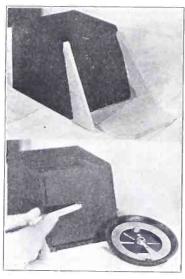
, (top), showing the sawed off portions, with the stained box. Fig. 5, (bottom), pencil pointing to the center hole for the variable condenser. Note the hole on the top, drilled for the purpose of holding the dial in position.
